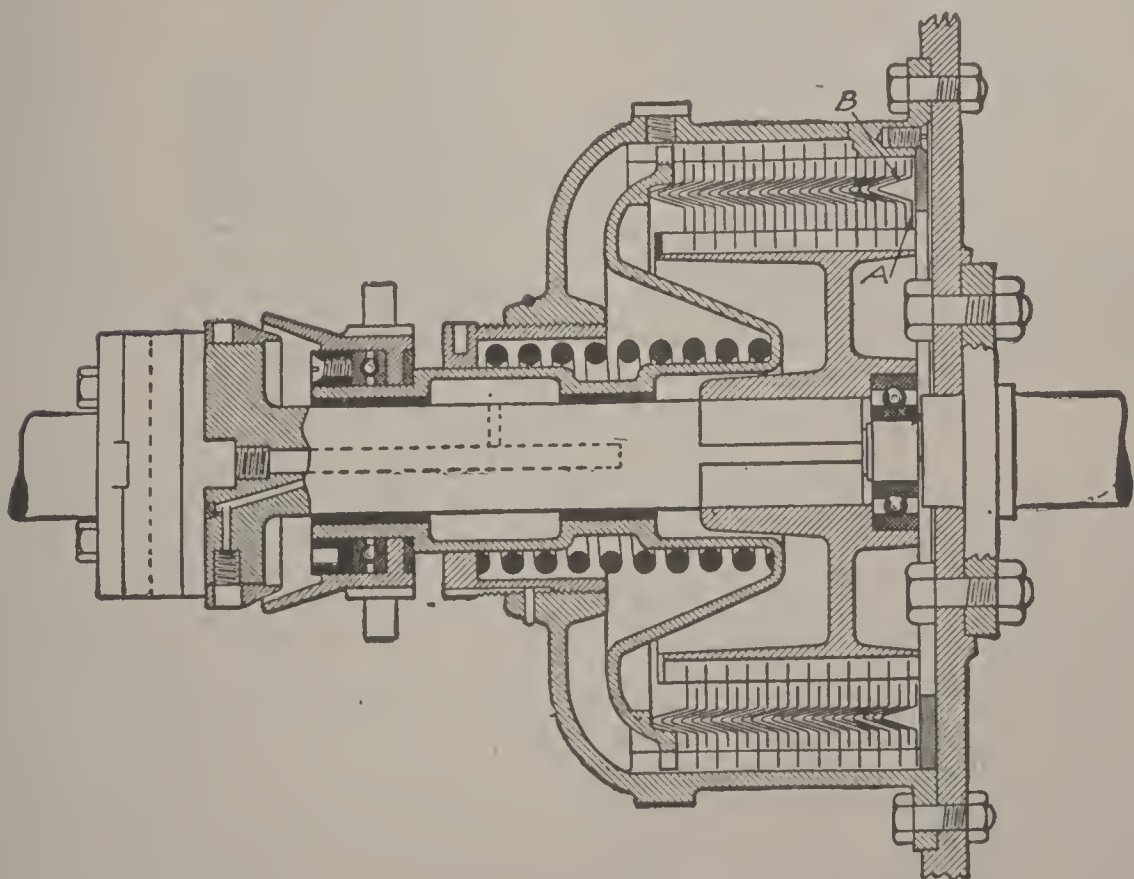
Hele-Shaw Disk Clutch Showing Cone Surfaces
